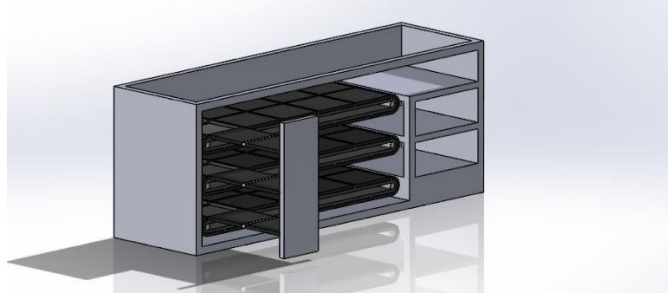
CHAD with loading drawer open. Note that base plates detach from conveyor and attach to drawer mechanism when drawer is opened.
